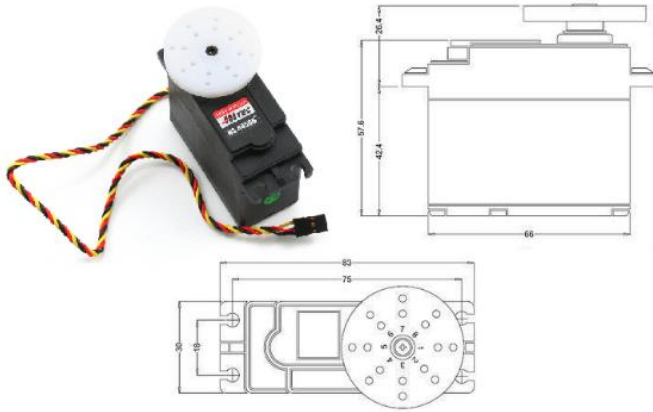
Real view of HS-805BB servo motor with its dimensions drawing
